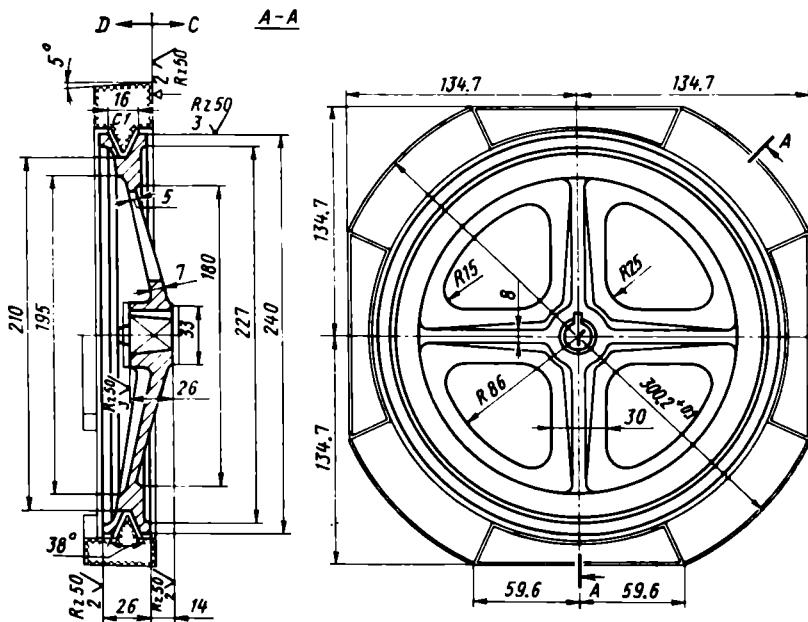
An example of working out the production drawing of a compressor pulley casting
